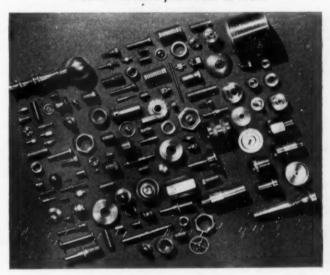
Below—Many different copper-base alloys are used for parts of this clock, including gears, plates, bearings, screws, case, hands, dial, and molding
